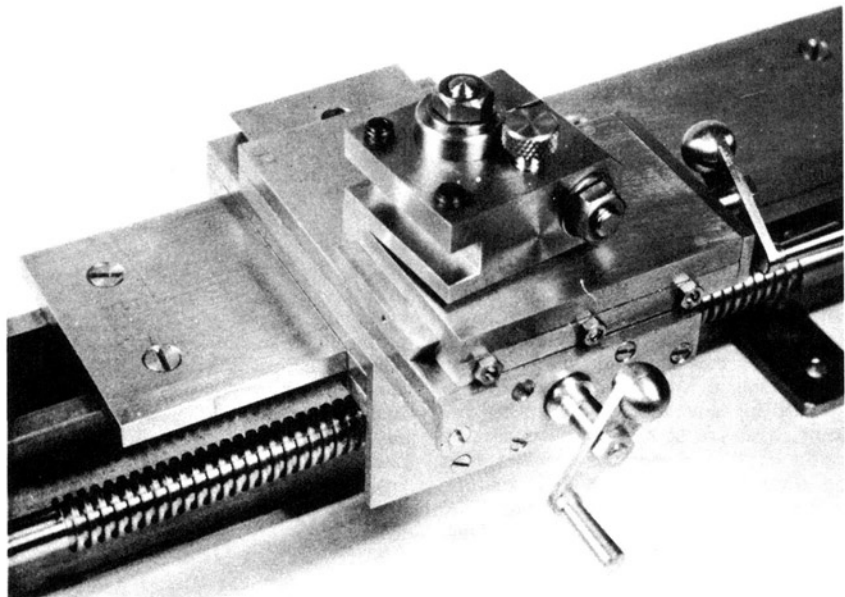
Completed toolpost, cross slide and saddle mounted on the bed.
